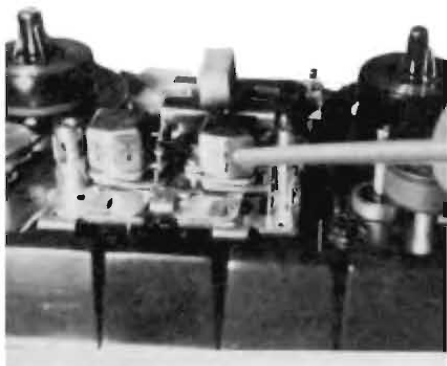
Open-plan assembly such as this makes servicing easy. Pressure pads are mounted on a flap which comes up to meet the rear of the tape; falls horizontal to allow easy access when the mechanism is neutralized.
